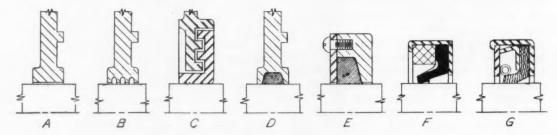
Common forms of bearing seals include mechanical clearance types (Designs A, B, and C), felt types (Designs D and E), and unit types (Designs F and G).
